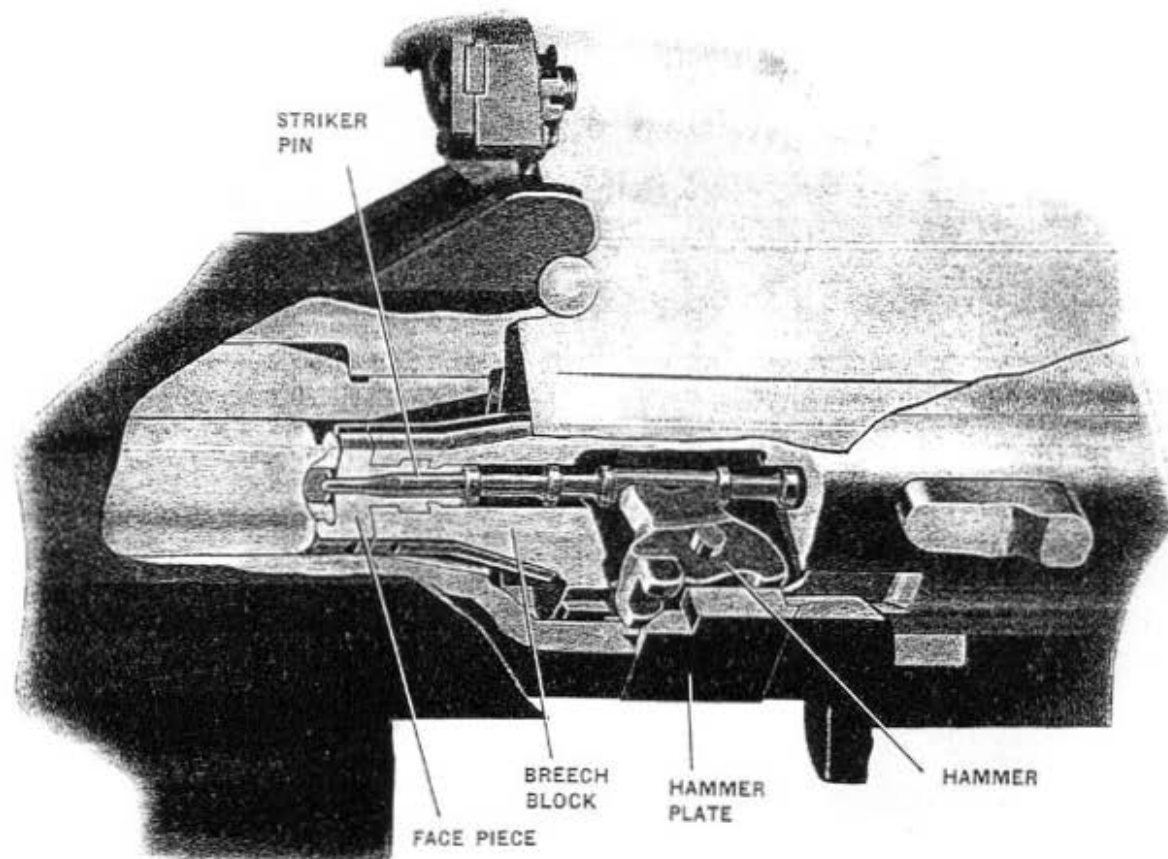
Breech bolt has carried cartridge into position to be fired. Rear hammer toe on hammer plate; front hammer toes in recess in breech casing
